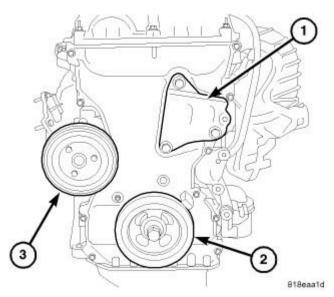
Right Side Engine Mount Bracket, Crankshaft Damper & Water Pump Pulley Courtesy of CHRYSLER GROUP, LLC
